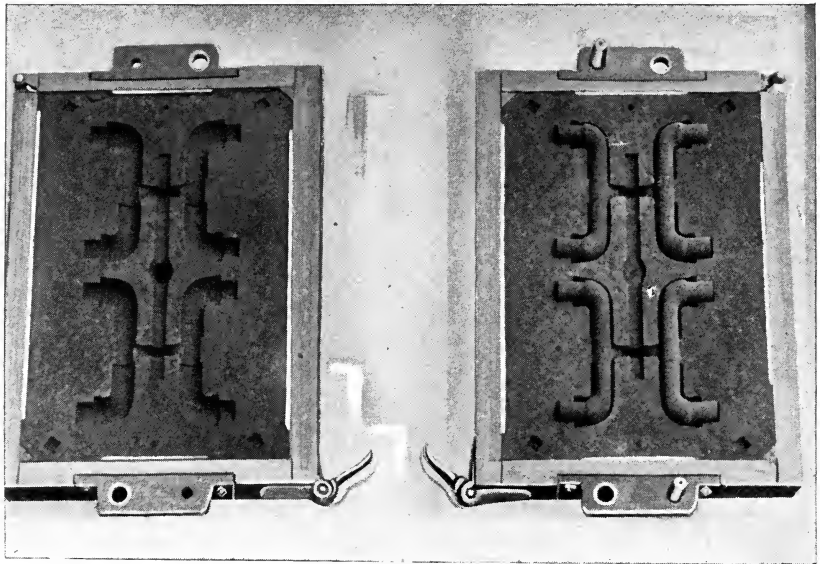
Cope and drag halves of mold for eight small street elbow castings
